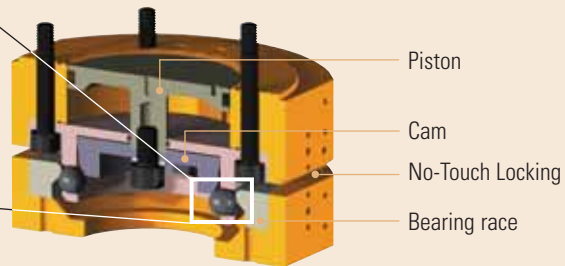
Section view of Tool Changer in Ready-to-Lock position (interface plate not shown)
